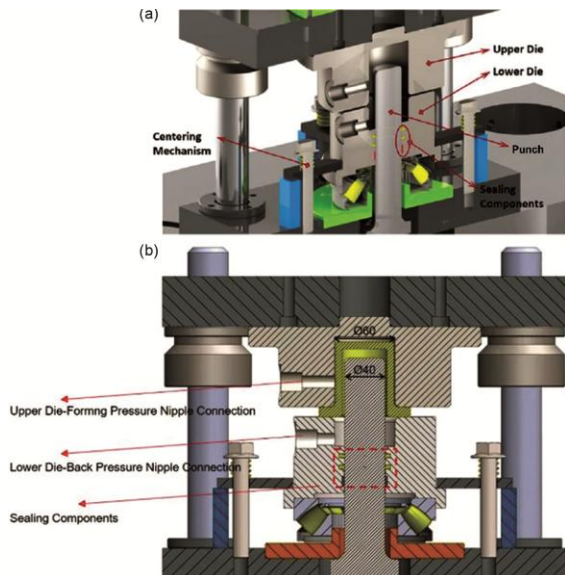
(a) Die design of DSH, and (b) detailed view of the upper and lower dies.
